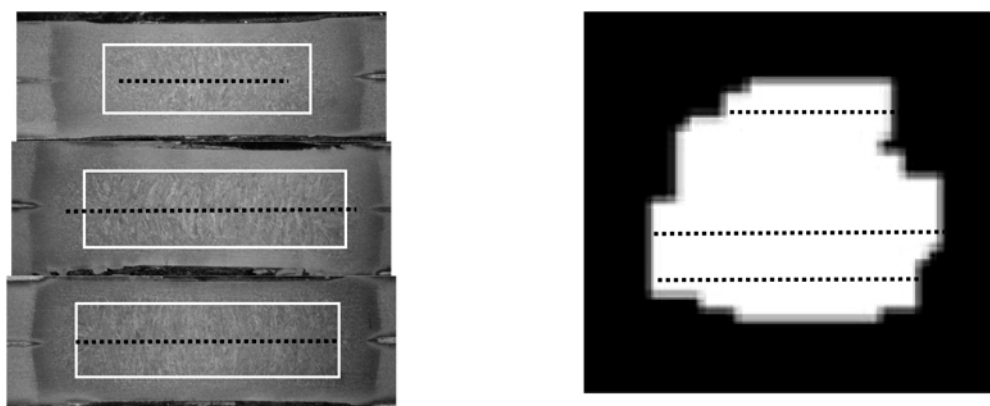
Metallographic images of a satisfactory weld obtained at three different depth levels in the weld (left-hand images) and the processed peak-ratio image obtained for the same weld (right-hand image). The white boxes in the metallographic images outline the boundary of the weld. The dotted lines in the right-hand image indicate the depths where cross sections of the weld were taken. These lines are superposed on the metallographic images to show the correspondence between the estimated weld diameter in the peak-ratio image and the apparent weld nugget in the metallographic images.
